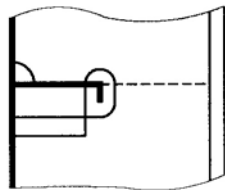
End connection of ordinary stiffener with one large collar plate
